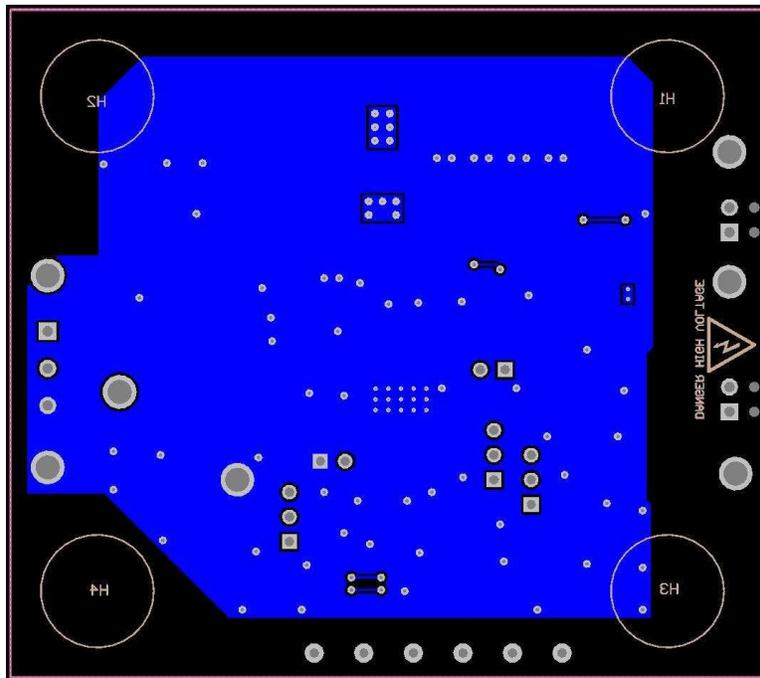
Bottom Layer and Bottom Overlay (Bottom View)
